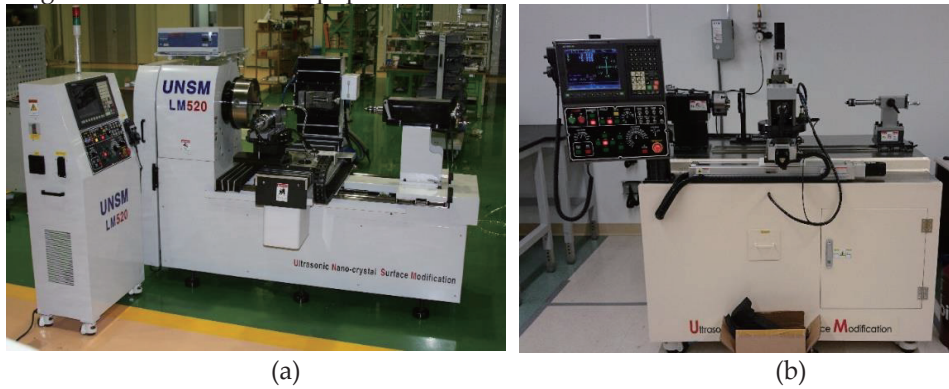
UNSM equipment with basic UNSM device: (a) Basic equipment for industrial application; (b) Basic equipment for specimen.
